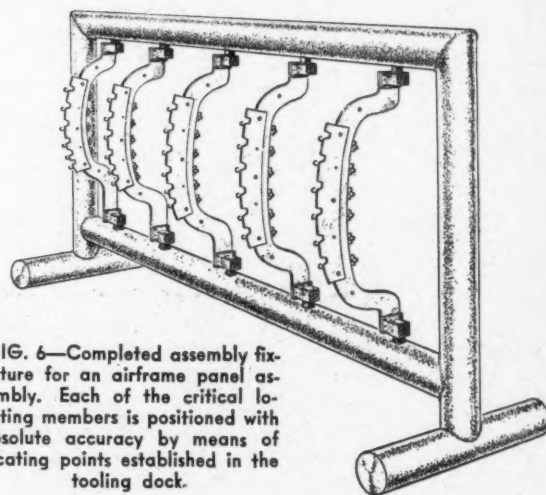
Completed assembly fixture for an airframe panel assembly. Each of the critical locating members is positioned with absolute accuracy by means of locating points established in the tooling dock.
